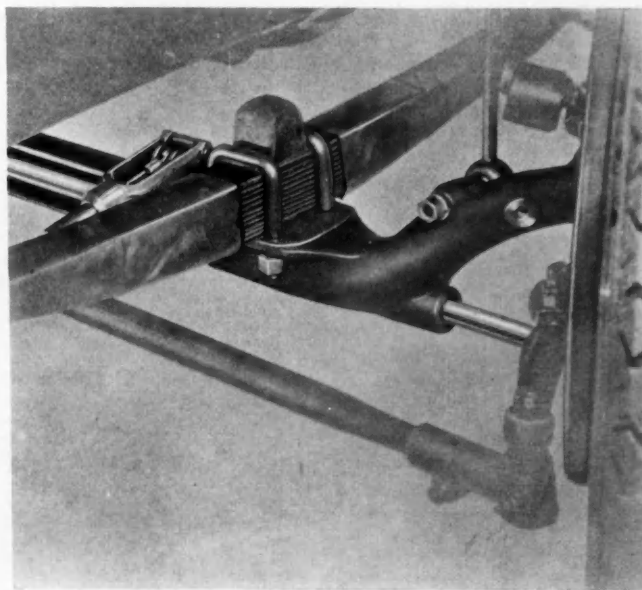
PIERCE-ARROW FRONT AXLE WITH CROSS BRAKE-SHAFT
